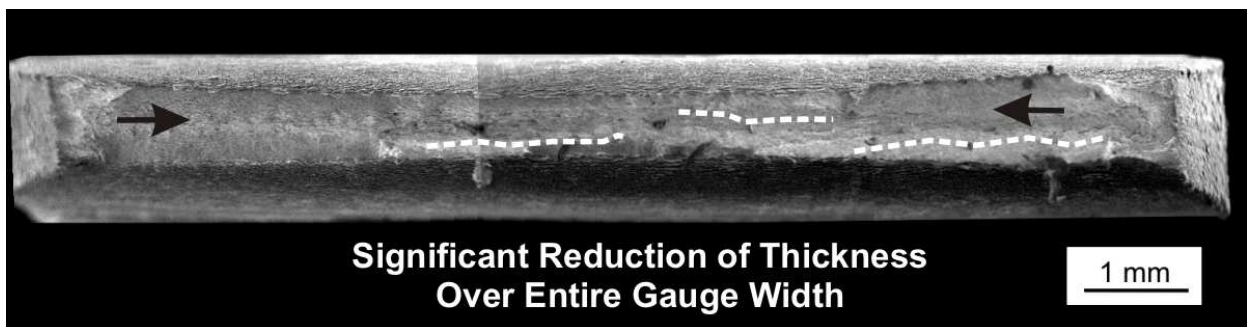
Top view of the fracture surface of a welded specimen that had a HAZ failure
